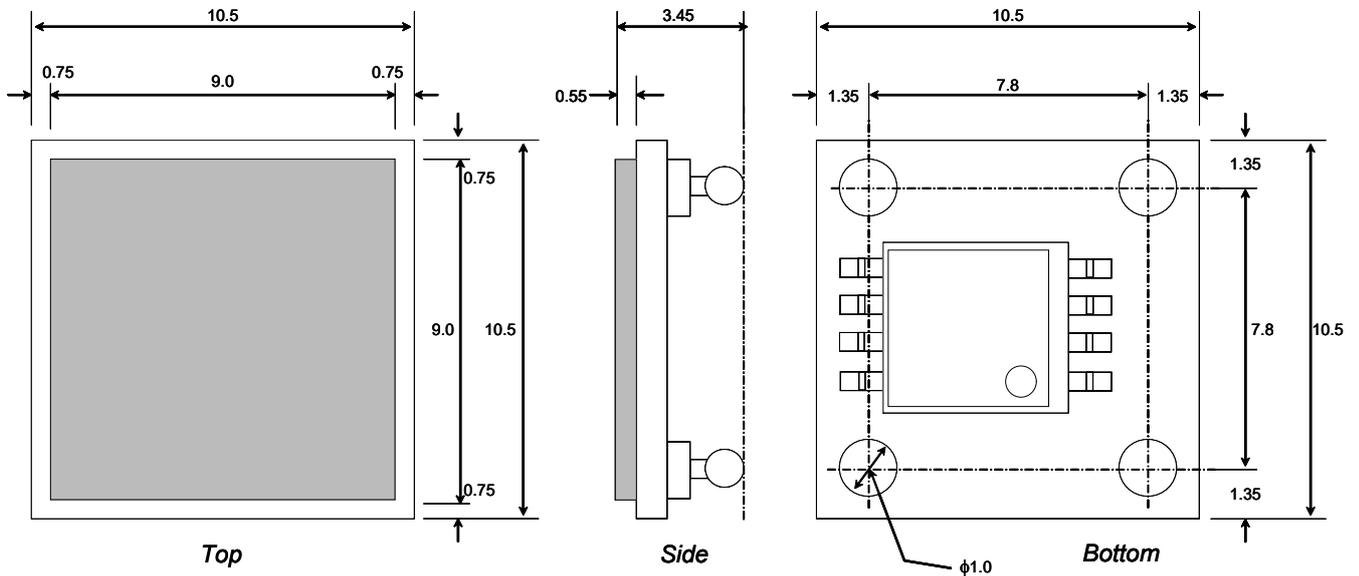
Mechanical Drawing (all dimensions are nominal and in mm)
